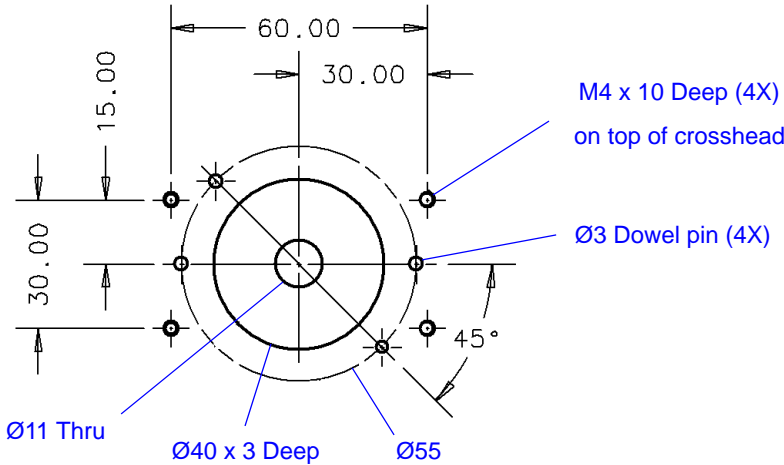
Series 5540 - Crosshead Mounting Dimensions
